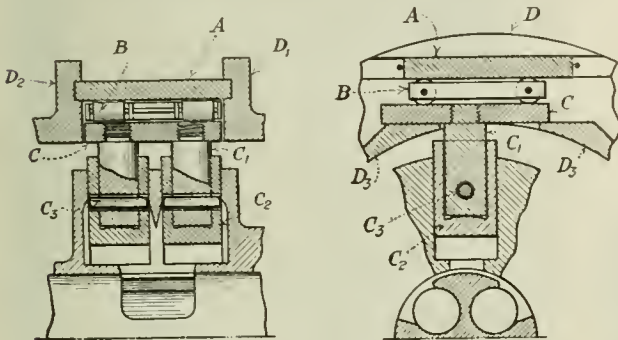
DETAILS OF PLUNGER AND CROSSHEAD UNIT
